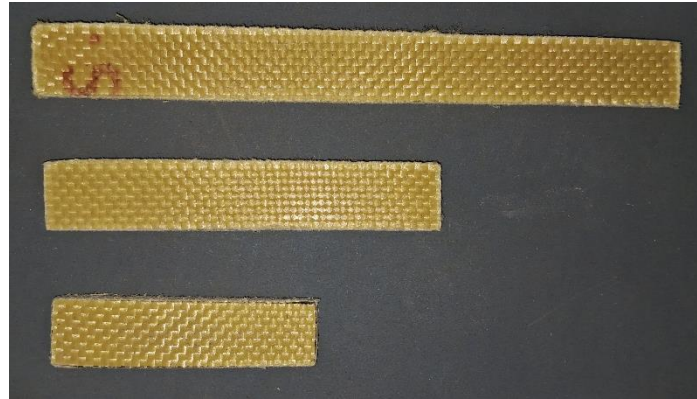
The machined tensile, flexural and impact test specimen (2 wt. % PTW)
